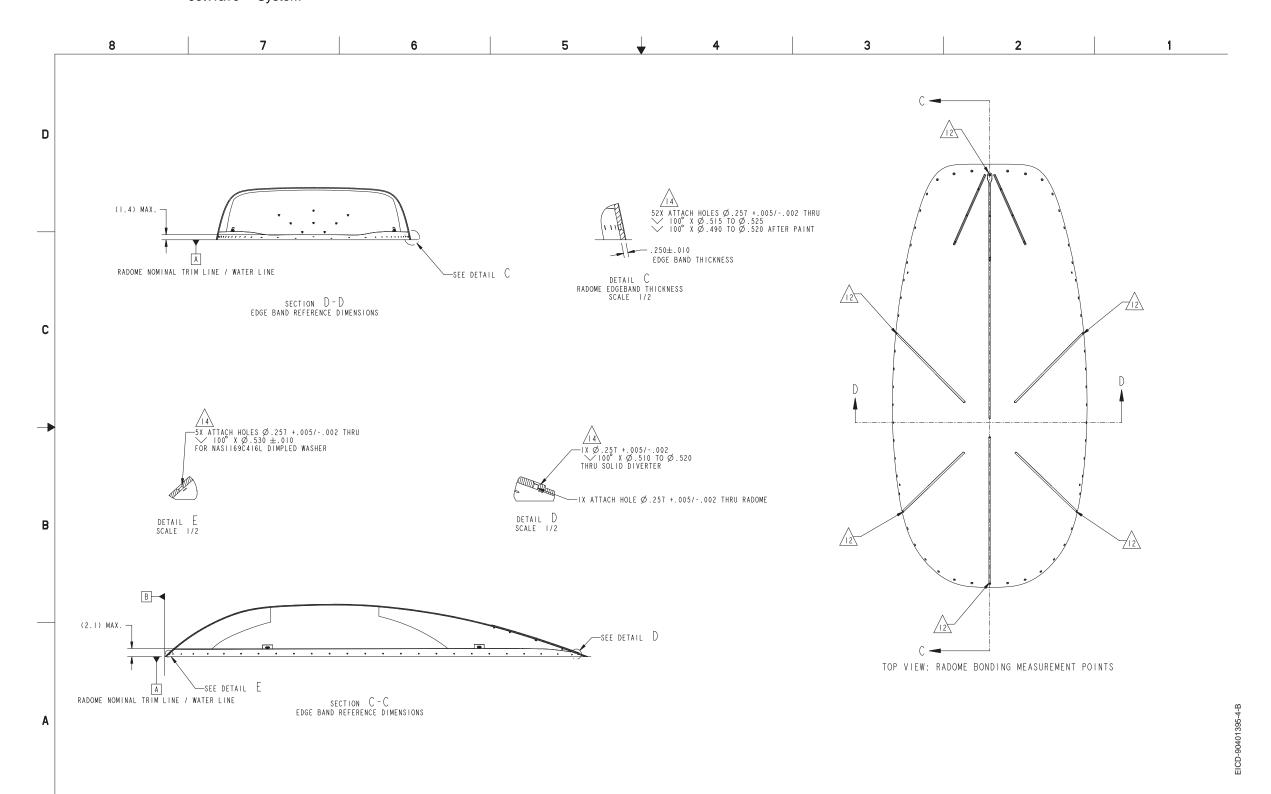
Fuselage Mount Radome Outline and Installation Drawing (Sheet 4 of 6)
